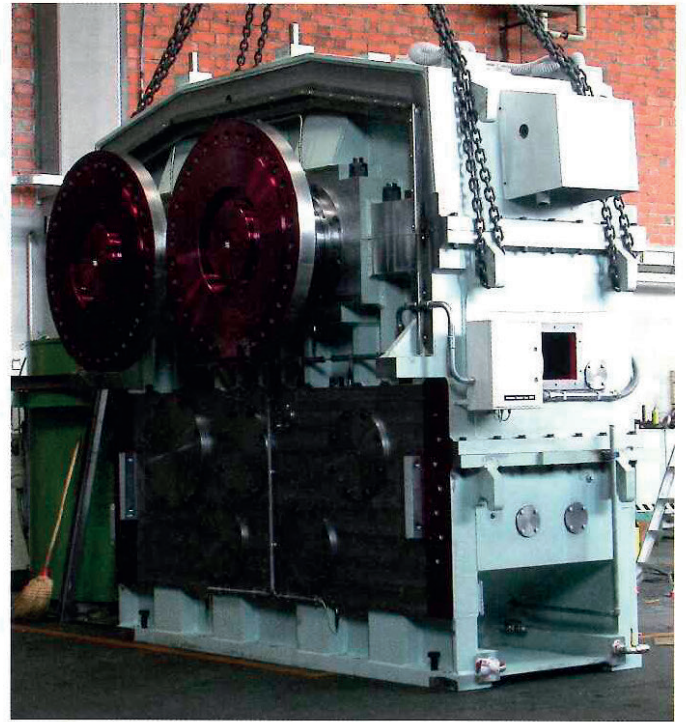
A GPS gearbox for a PB48Sp press with vibrations gear case and dehumidifier (vibrations gear case is a panel where all vibrations read on the gearbox are collected for reading)
